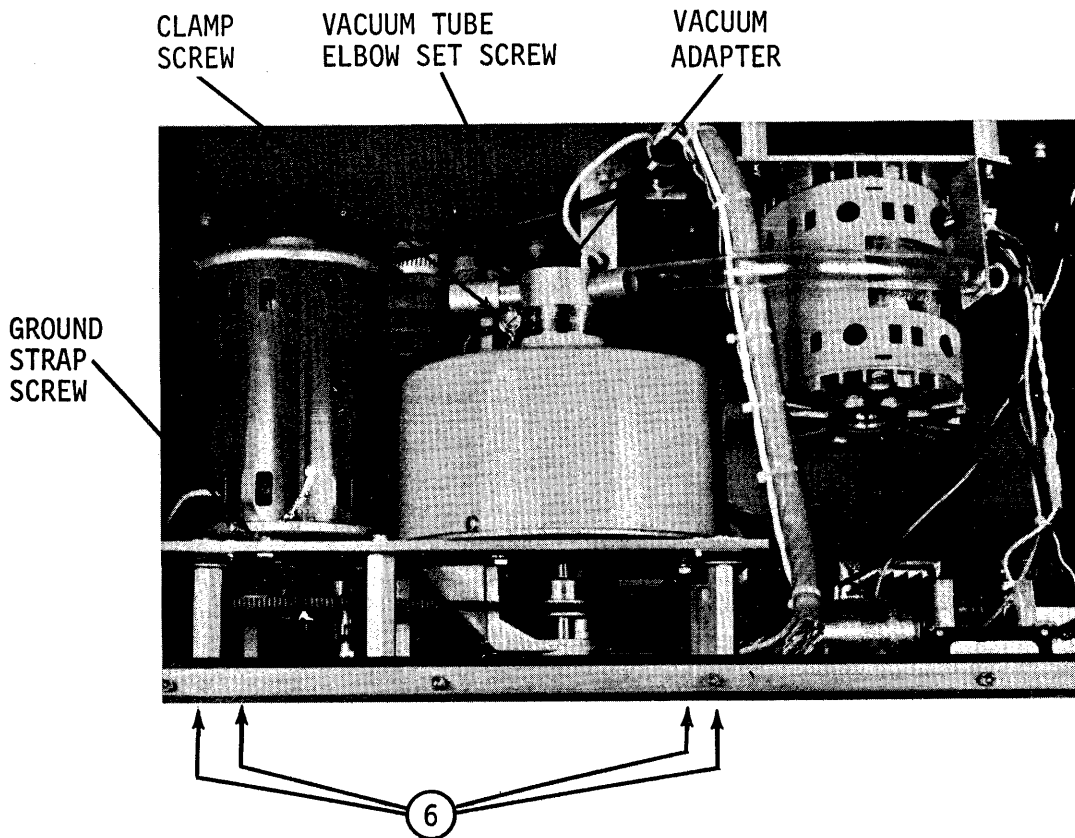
Removal of Vacuum Blower Motor Assembly
